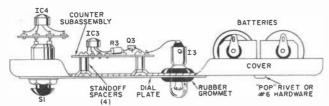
This cutaway view of the front cover shows how the subassembly is mounted on the spacers. Observe that the mounting screw holes are recessed a bit so the dialplate can lay flat on the cover assembly.
